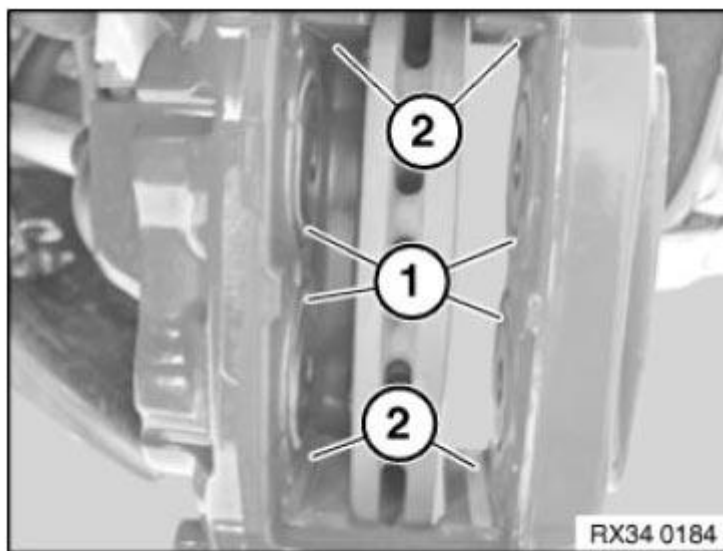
Identifying Brake Pad Contact Surface Coating Areas
